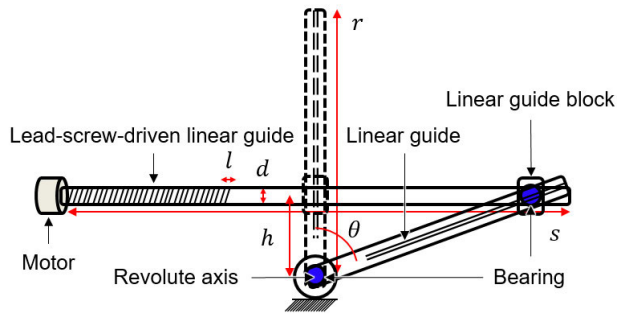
Concept design of the lead-screw-driven revolute joint.
